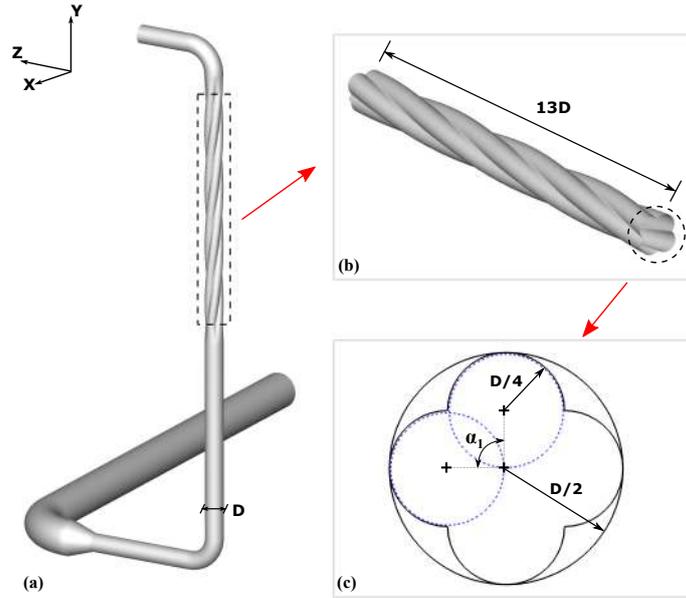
Schematics of the proposed pipe wall with 4 undulations.
